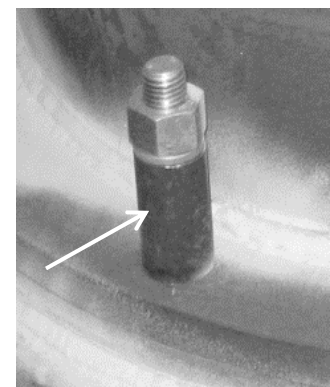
Pressure Vessel Hold-down Bolt on Recip Compressor Skid, Use of Pipe to Provide Adequate Bolt Free-Stretch Length.
